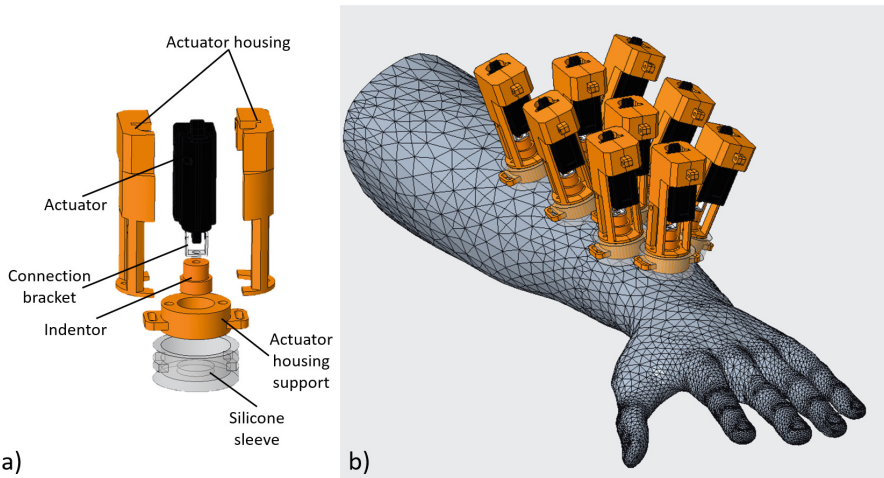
Mechanical design of the device. Subfigure a) shows an exploded view of one actuator unit while subfigure b) shows a concept of the proposed system with nine actuators mounted on the forearm.
